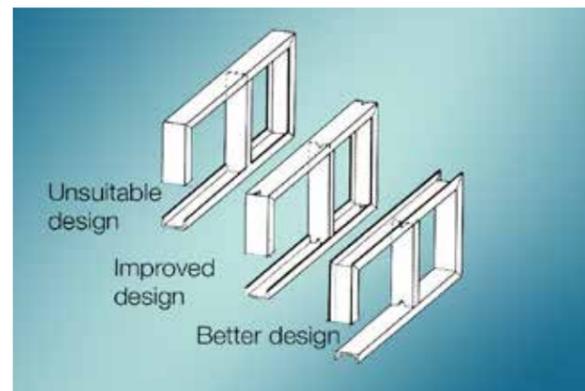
Corners on stiffening plates in e.g. beam webs should be cropped. Drainage holes should be located as close to the web as possible. Diagonals in lattice structures should not run up against frame bars.
